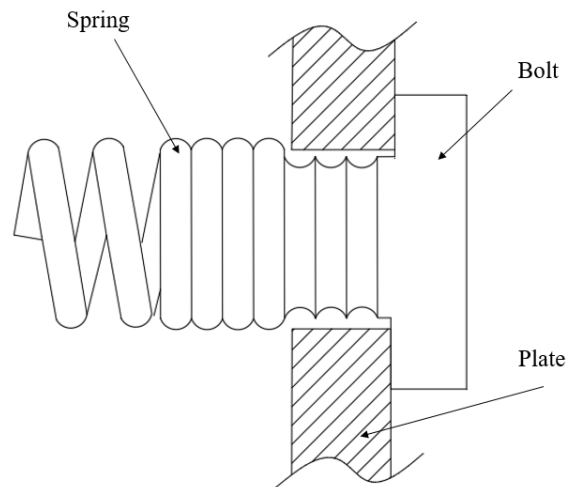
A bolt and mounted helical spring adapted from [68]
